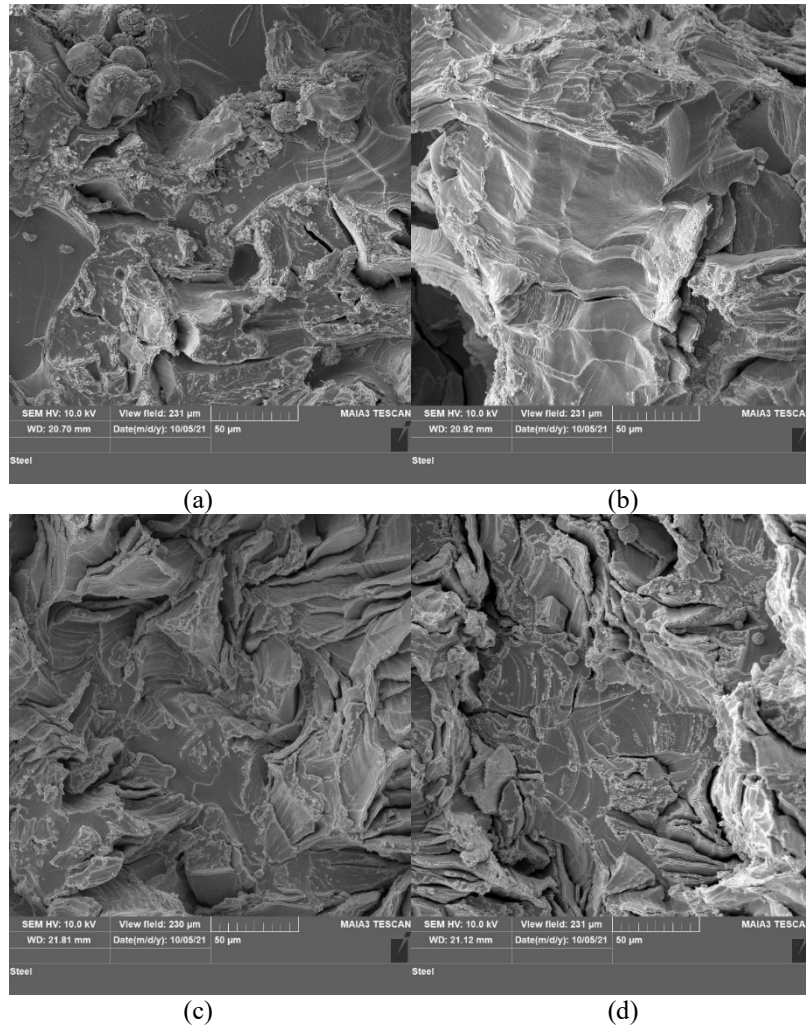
Fracture Surfaces of Samples Processed in 2.5% H_2 at 100 mm/s (a), 200 mm/s (b), 400 mm/s (c), and 600 mm/s (d), Subjected to Three-Point Bend Testing at 600 °C at 1.2kx Magnification
